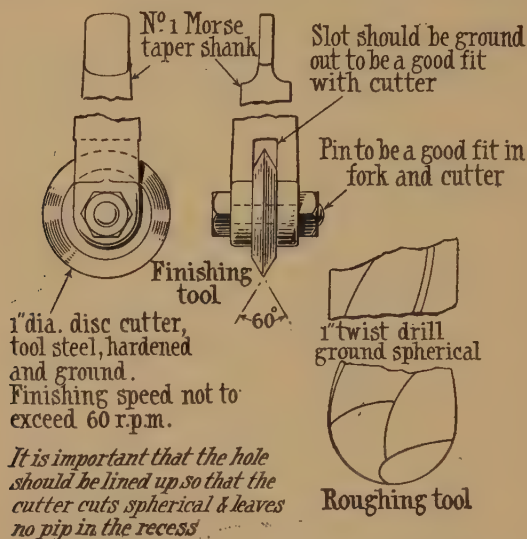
Cutter used to Machine Spherical Recess in Specimen in Fig. 5.
